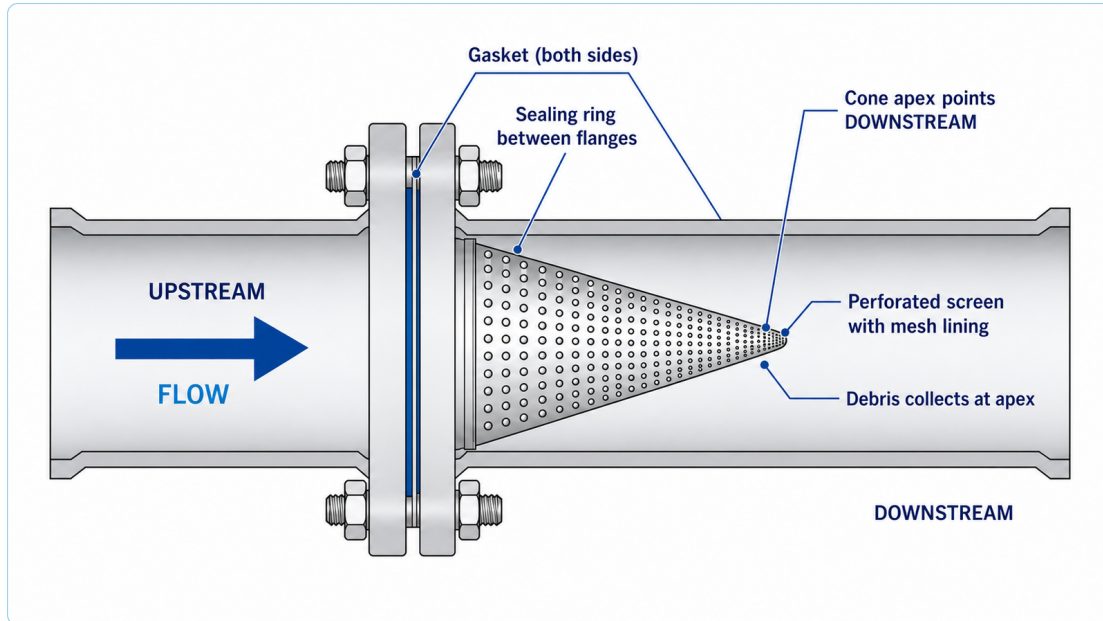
Cross-section of a conical strainer correctly installed at a single flanged joint, with the sealing ring captured between gaskets on both faces and the cone apex pointing downstream into the open pipe bore.
